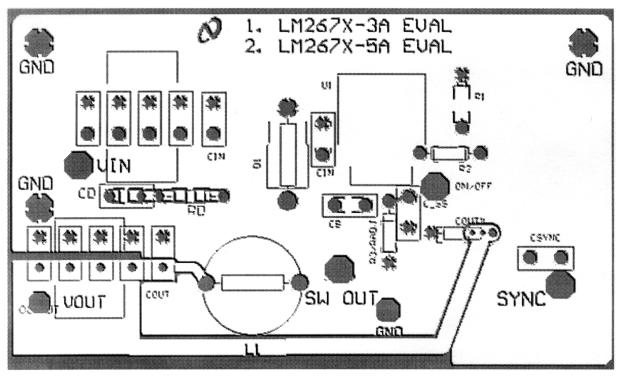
Bottom Layer Foil Pattern of Printed Circuit Board
